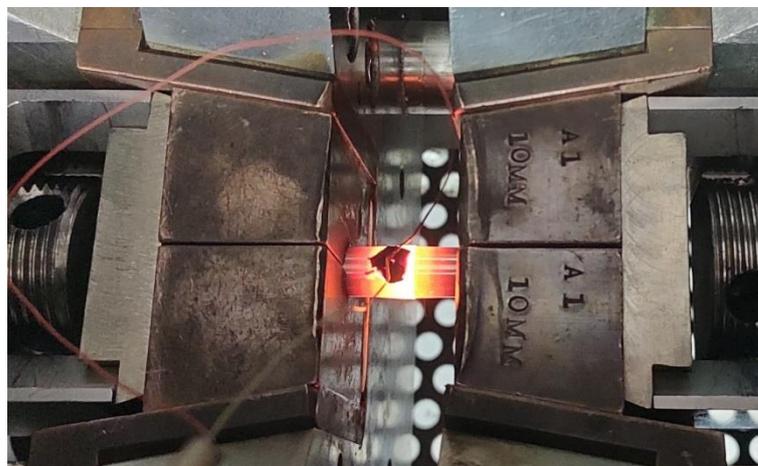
View of the specimen during the welding experiment at 800°C
